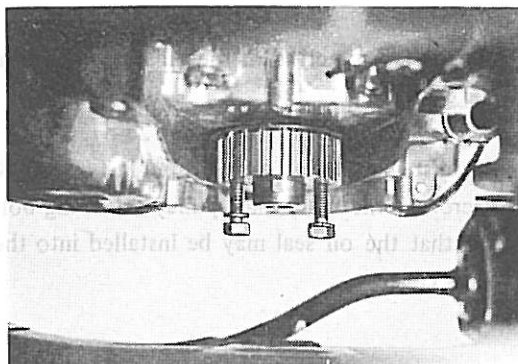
Removing Crankshaft Timing Belt Pulley
